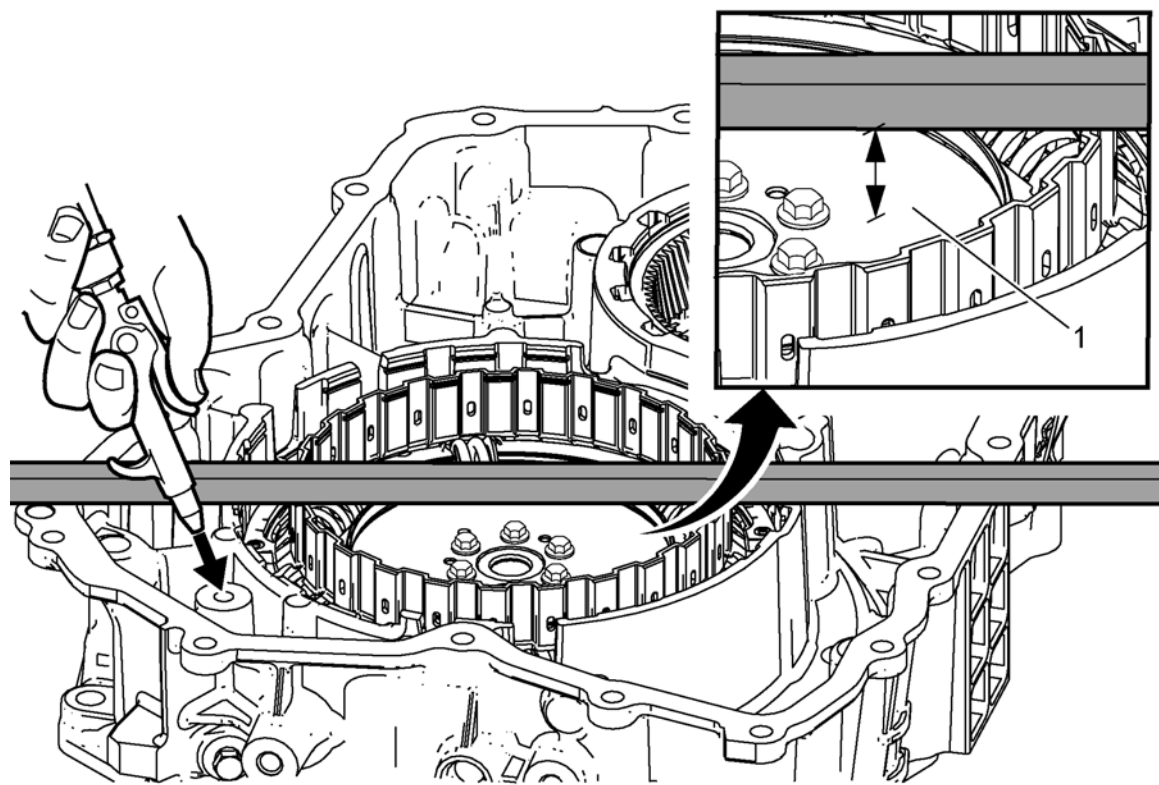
Automatic Transmission Torque Dampener Thrust Washer Measurement (Step 2)
